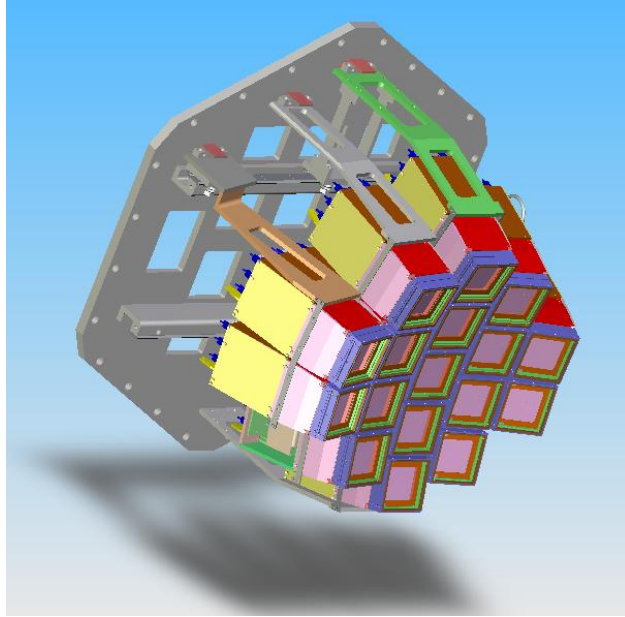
Drawing of the HiRA Array mounted on a modified  $4\pi$  flange.
